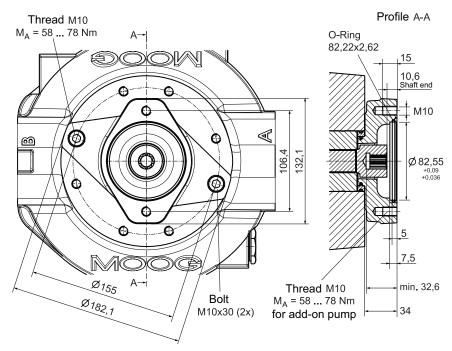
Adapter flange SAE-A with 9-tooth shaft
